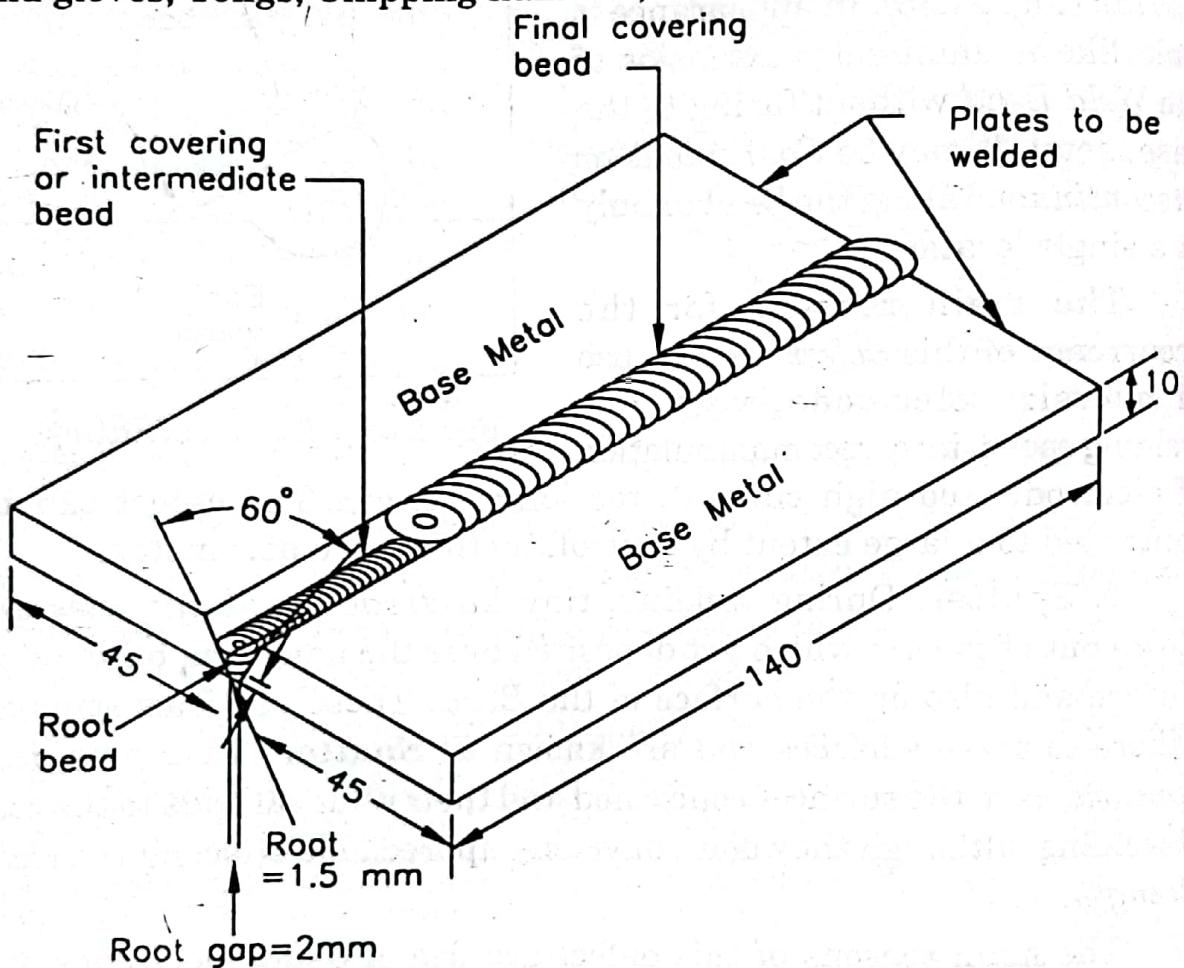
Butt-joint (Single-V) through Arc Welding in Flat position.
